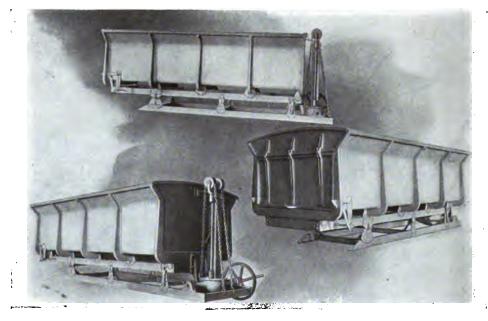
Examples of all steel heavy dumping bodies with hoisting equipment.
